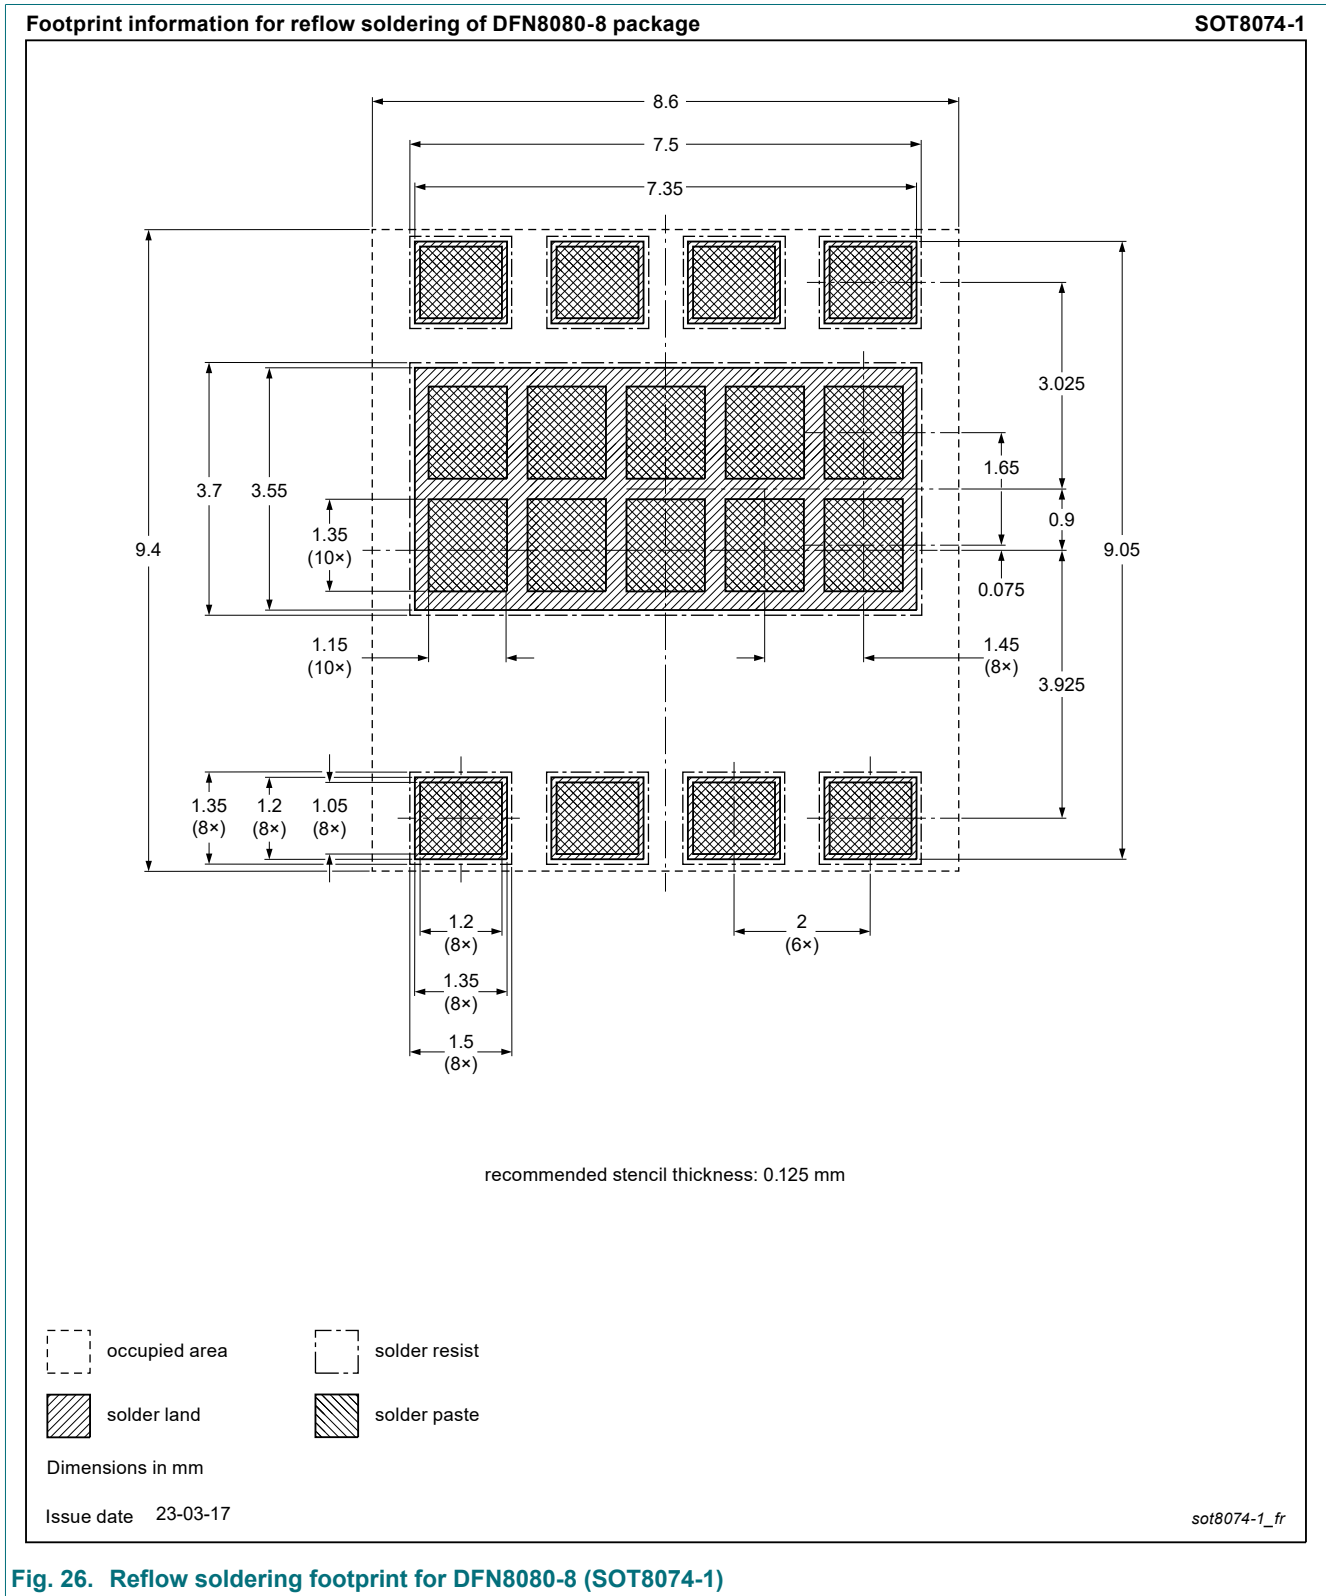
Reflow soldering footprint for DFN8080-8 (SOT8074-1)
